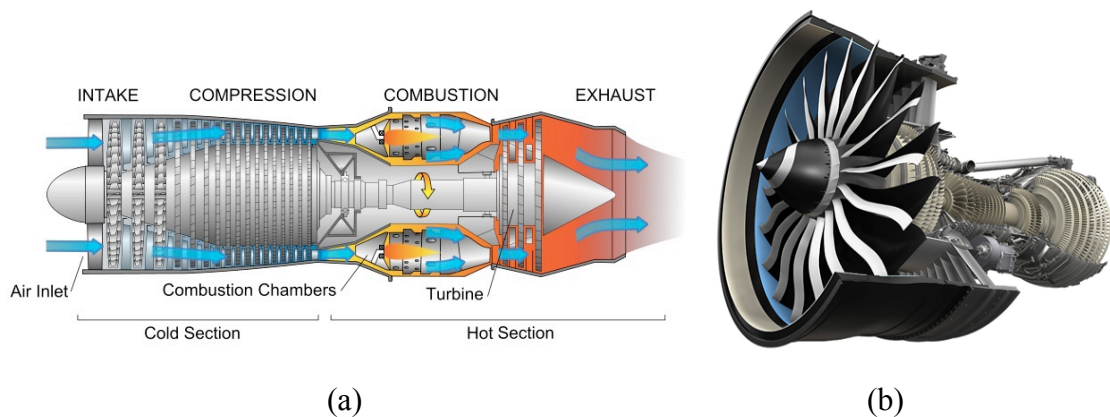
(a) Schematic of a typical jet engine illustrating the hot section turbine blades.^[3] (b) Cross-section of a GE9x aircraft engine, courtesy of GEAE.com.
